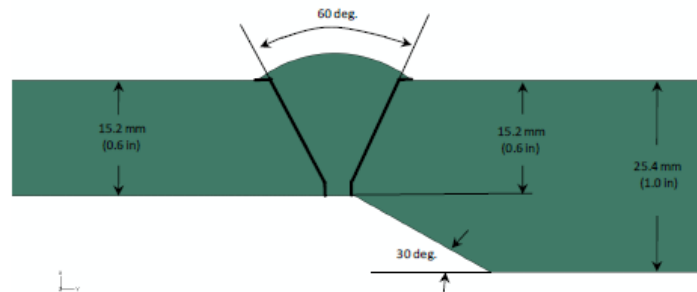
Joint with no high-low misalignment and obtuse angle at weld toe
